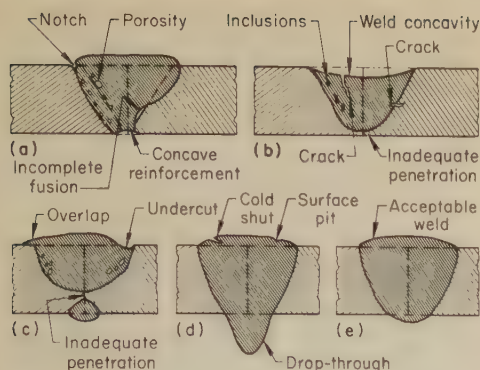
Typical defects (views a through d) that occur in the arc welding of heat-resisting alloys. View (e) represents a weld with no defects and good reinforcement.
